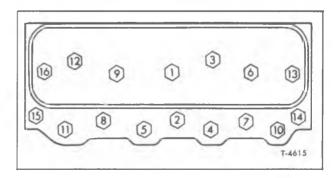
Cylinder Head Bolt Tightening Sequence on 366 and 427 Engine
